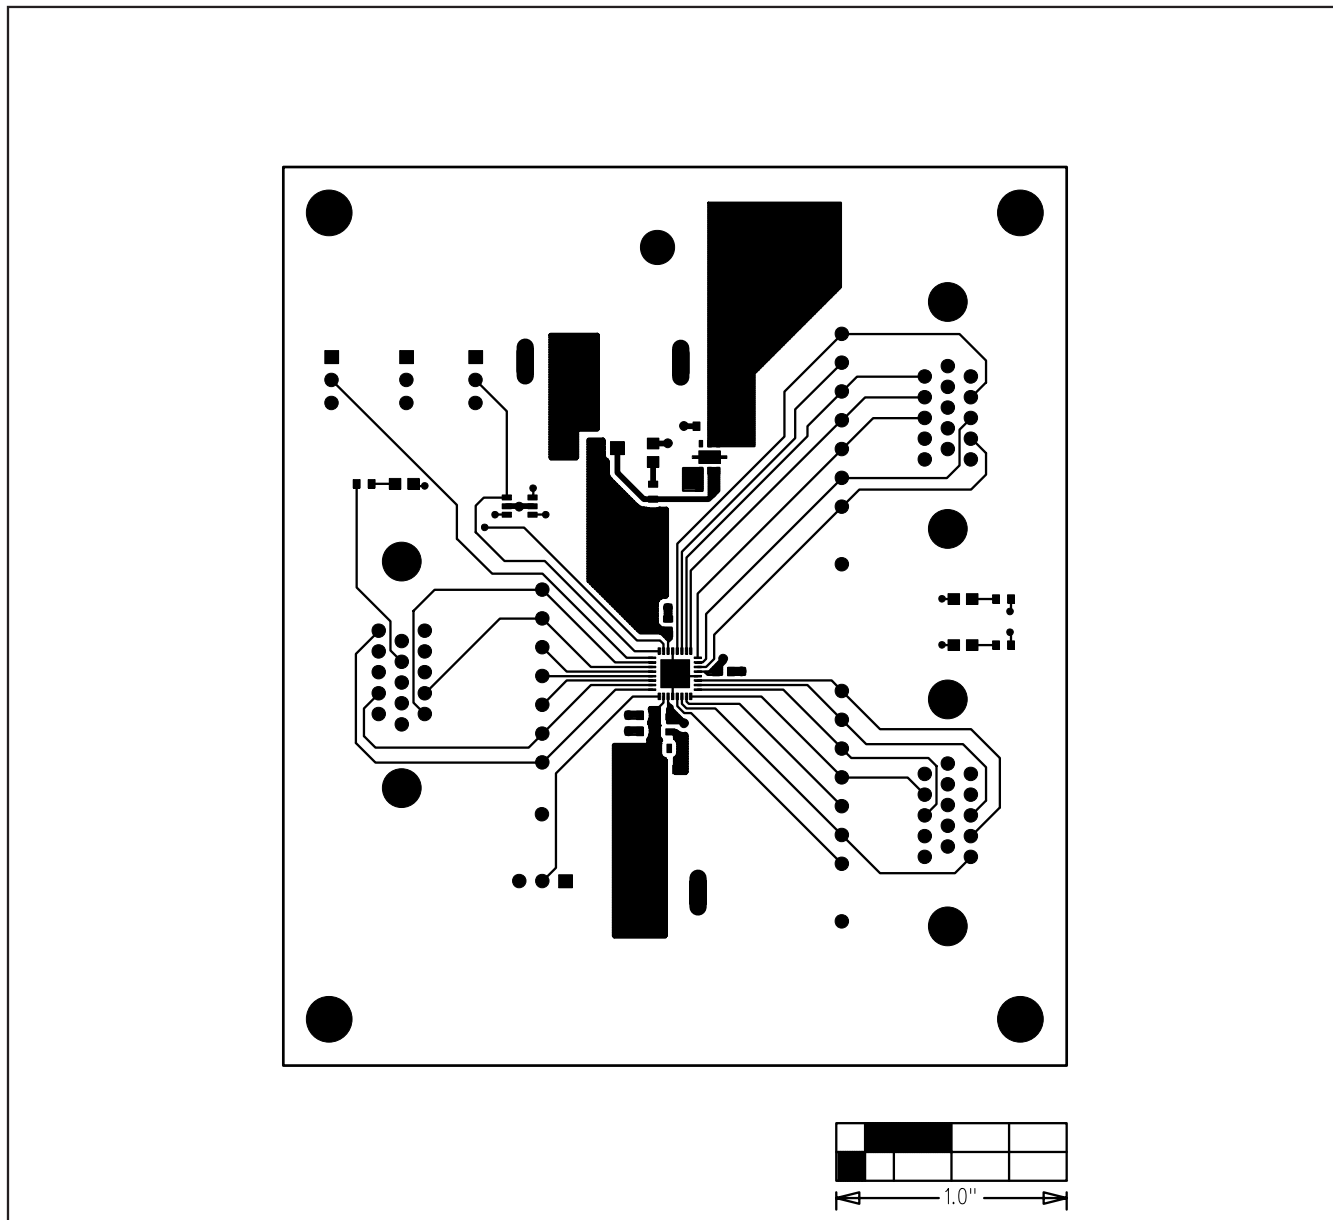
MAX4885 EV Kit PCB Layout—Component Side
